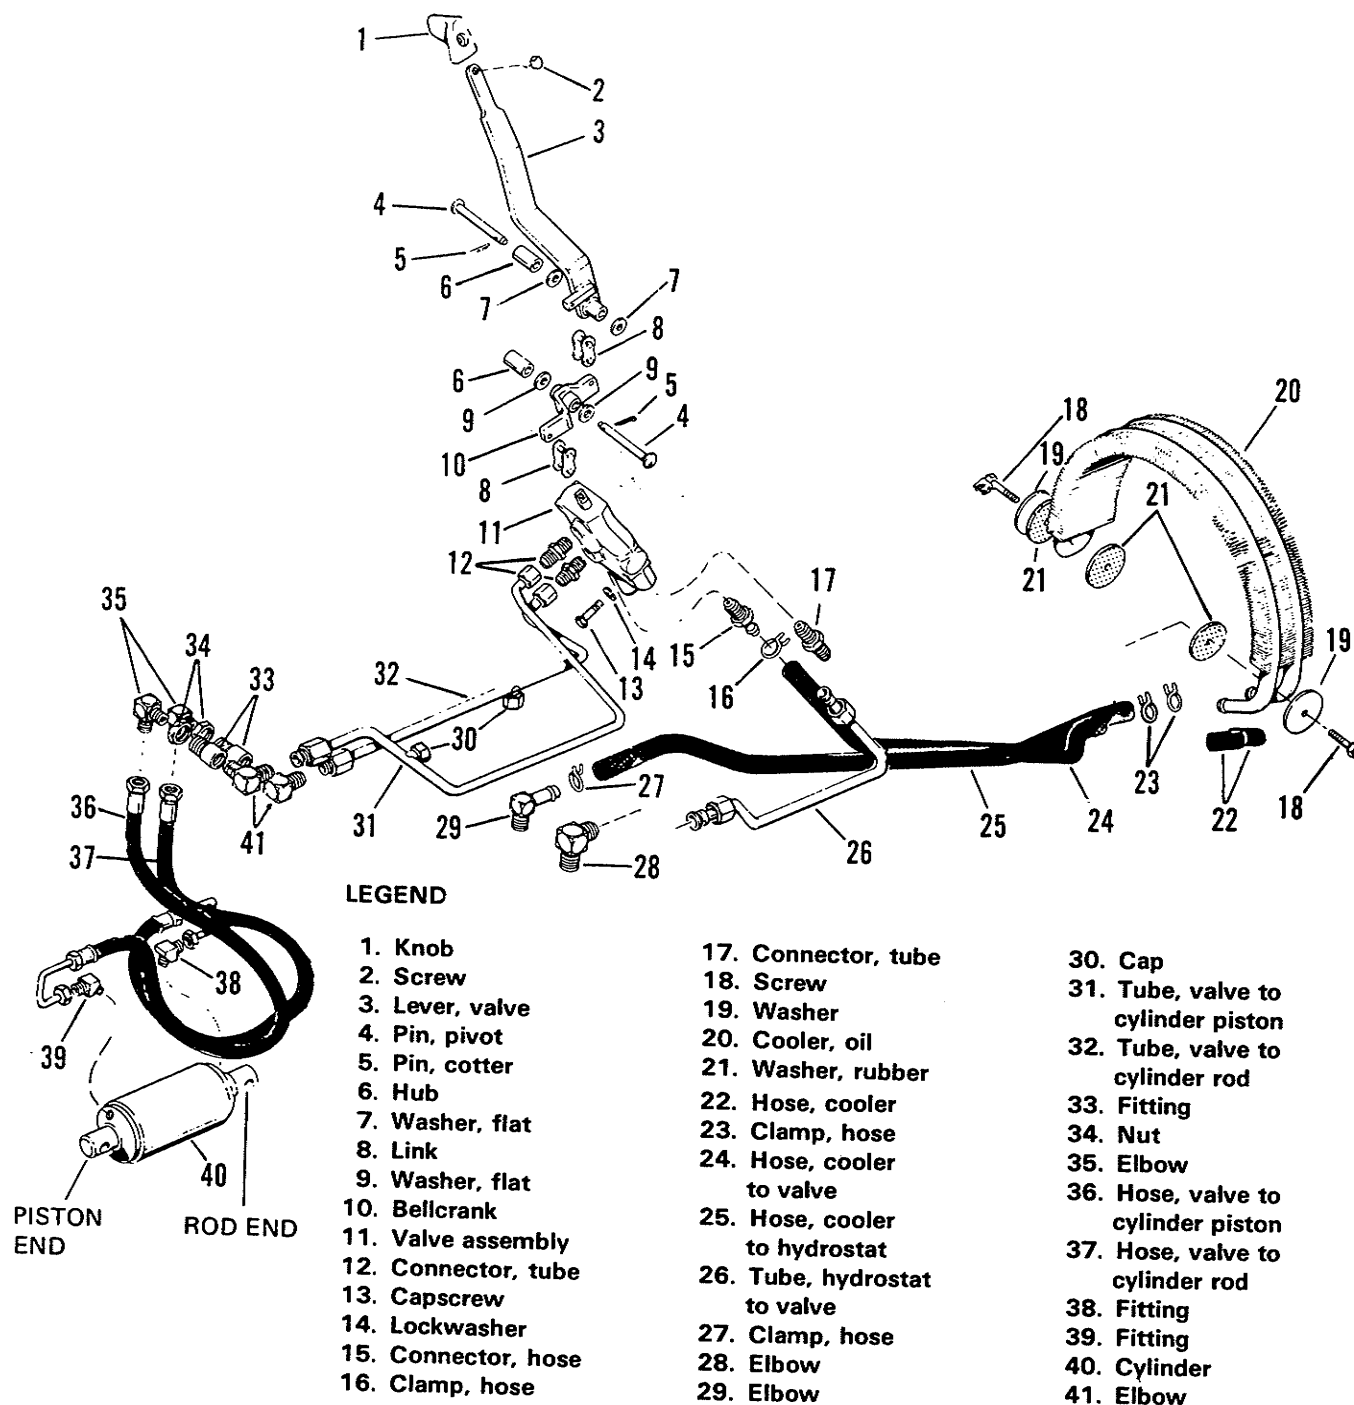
Power Lift System Removal and Installation (4040, 4041, Pow'r Max)
